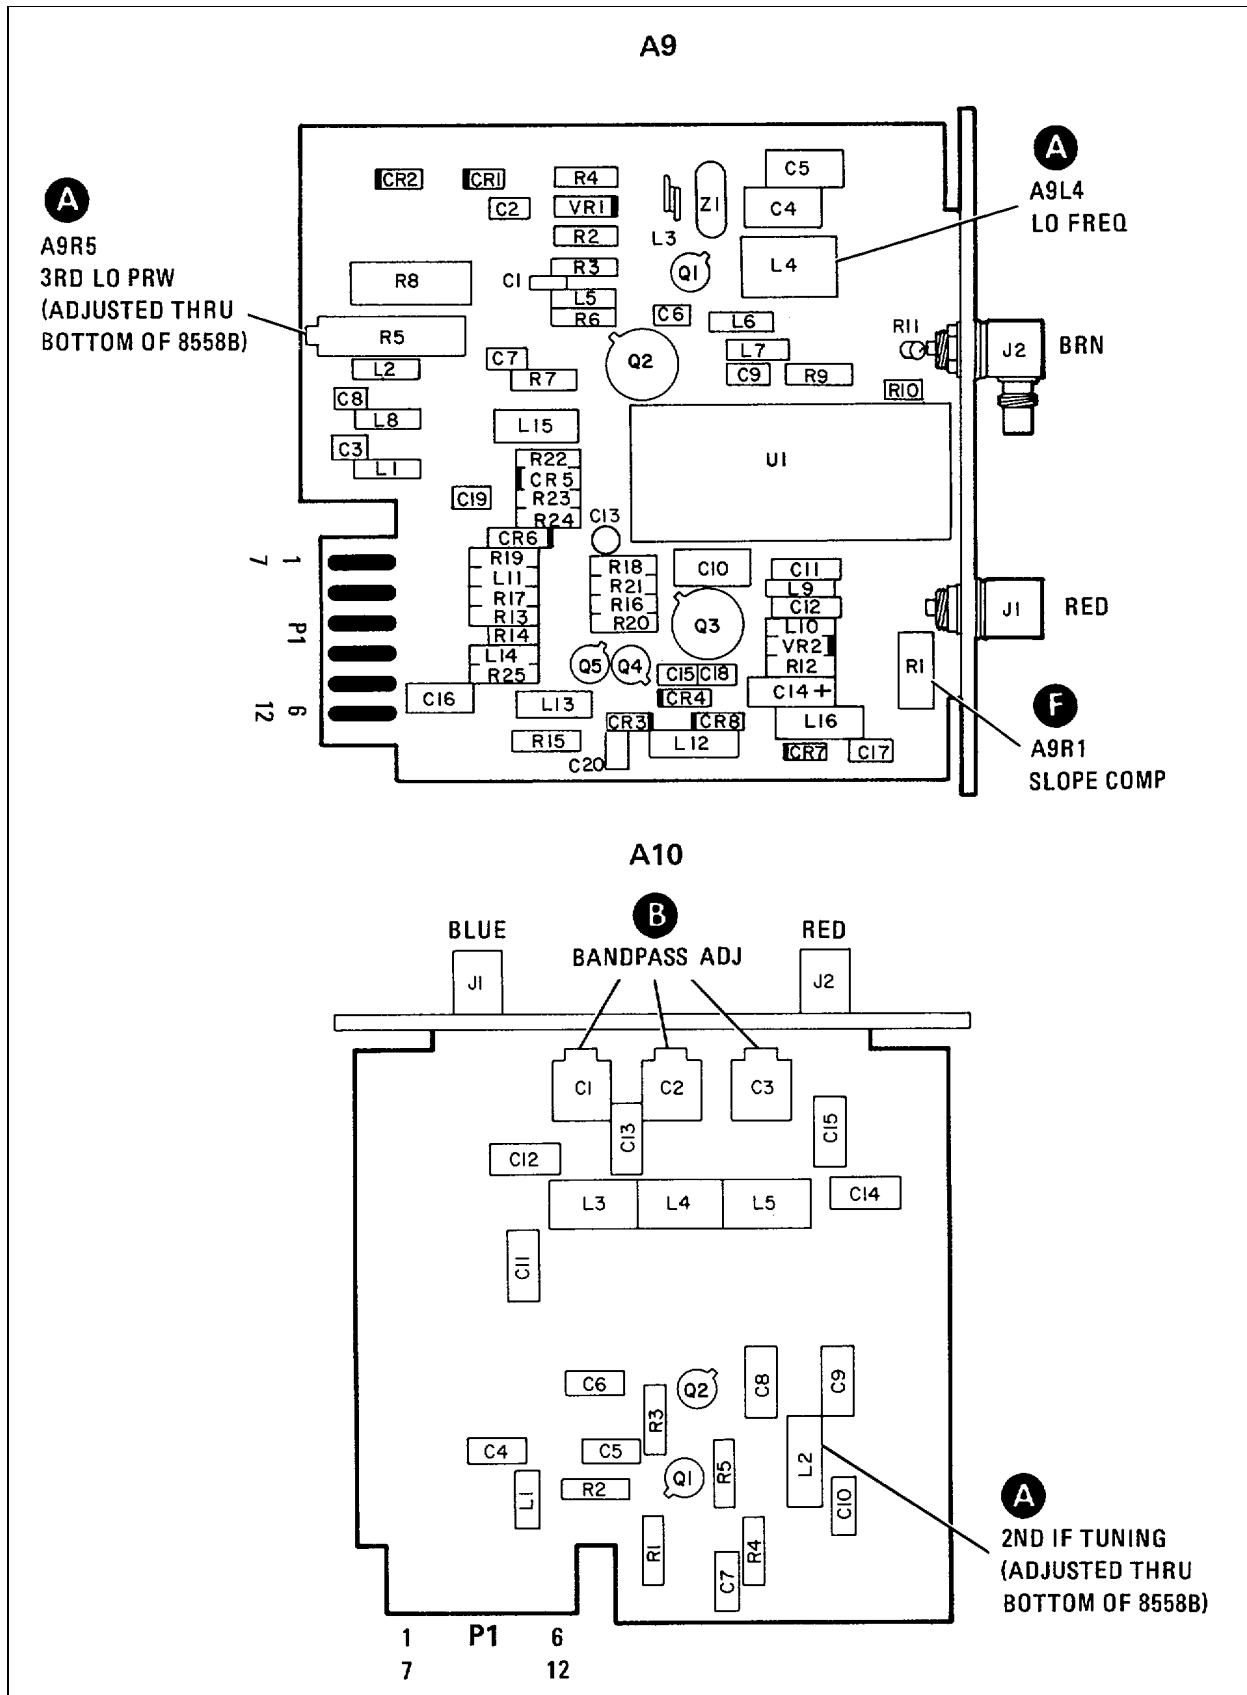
A9 Third Converter Assembly, and A10 Second IF Assembly, Component Locations
